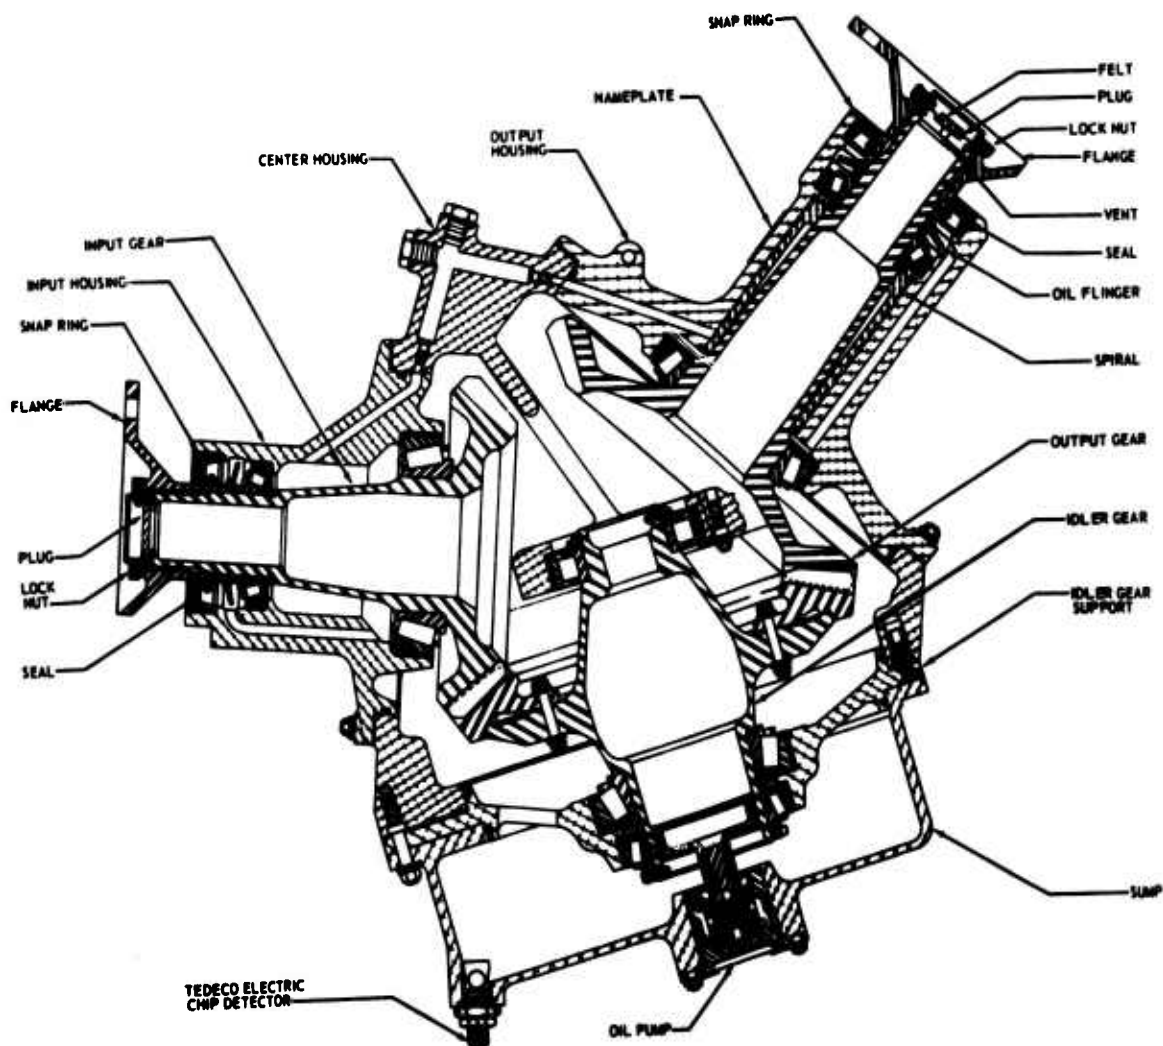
CH-54 Intermediate Gearbox Cross-Sectional View.
